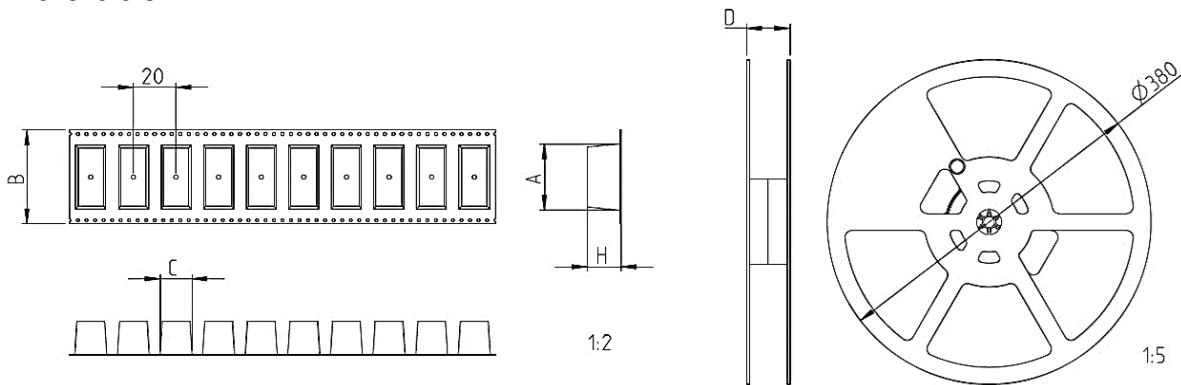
/ Bild 2: Packaging Dimensions [mm]
